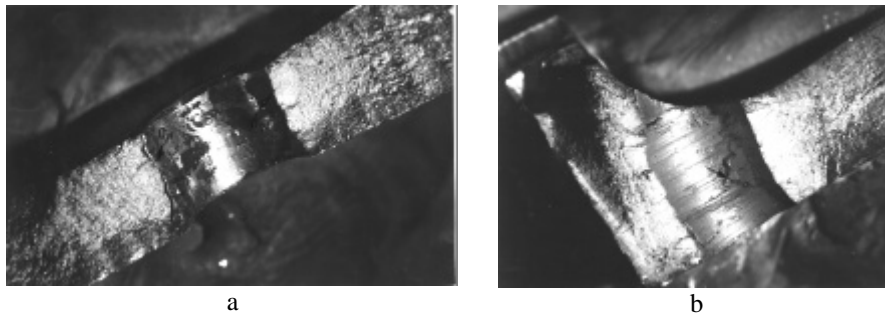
The fractures at: a – rear beam, b – stringer nr 1D
